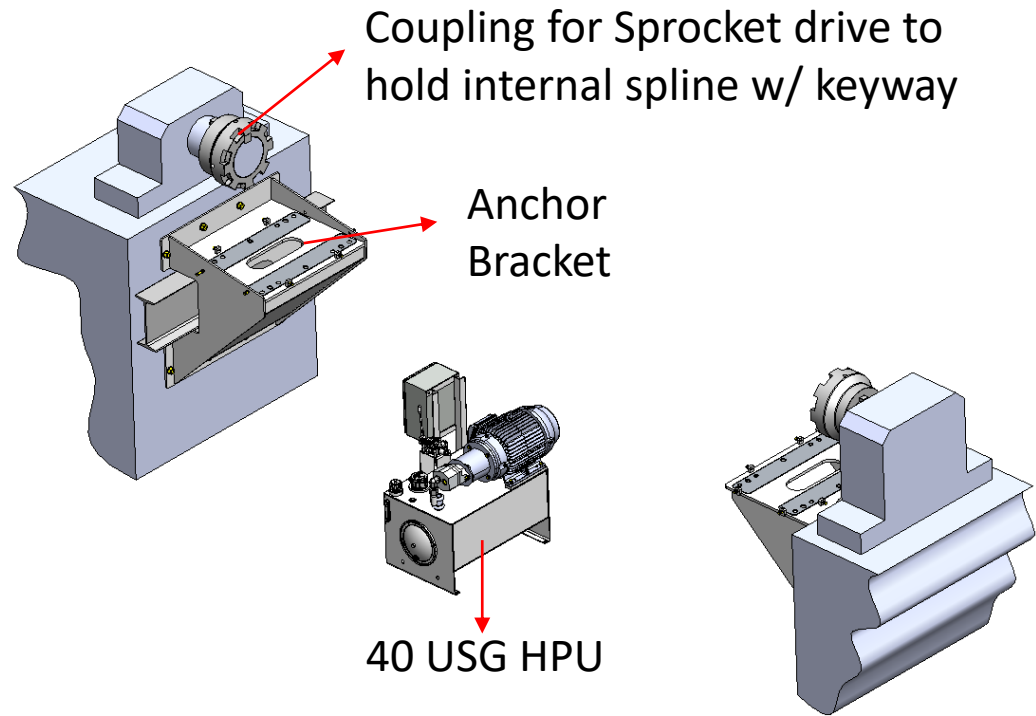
; Inching drive mechanism for controlled circumferential welding
